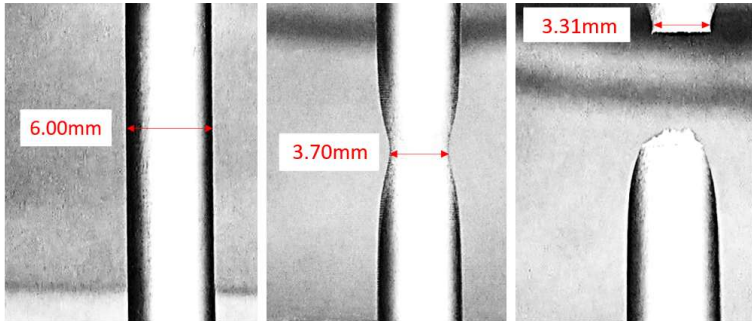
Left: Initial tensile Probe shape, Middle: Shape one picture before fracture, Right: Fractured shape
